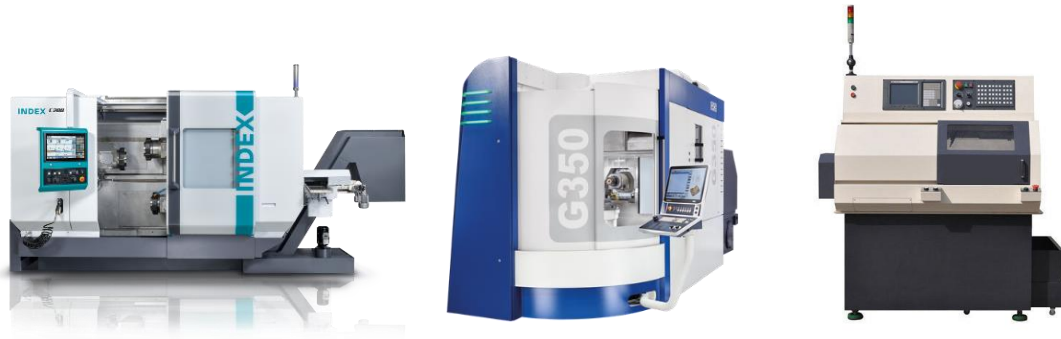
Different types of CNC machines in each sector – lathe (left), milling machine (center) and combitec (right)
